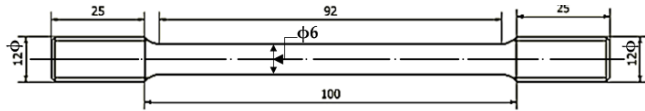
Standard circular dog bone tensile specimen for thermomechanical treatment (dim. mm)
